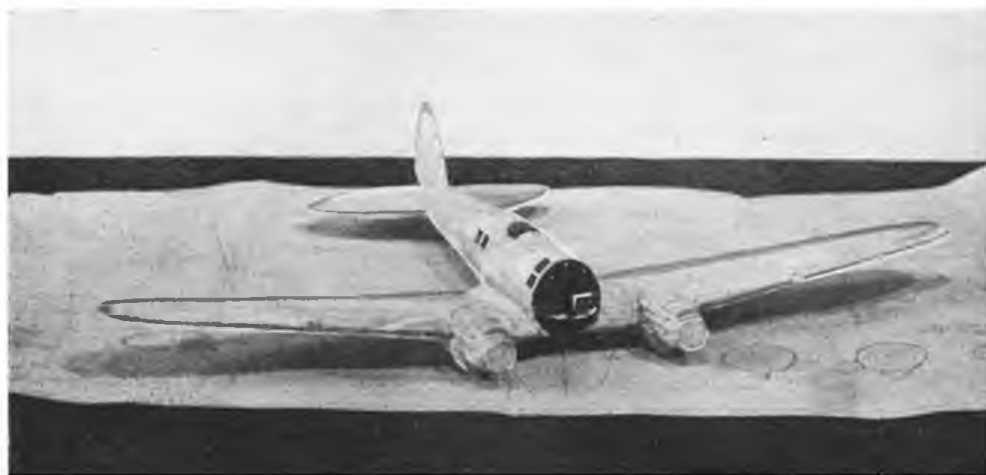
A stage during assembly. The wing and tail unit are in position on the fuselage and the motor nacelles are fitted.
